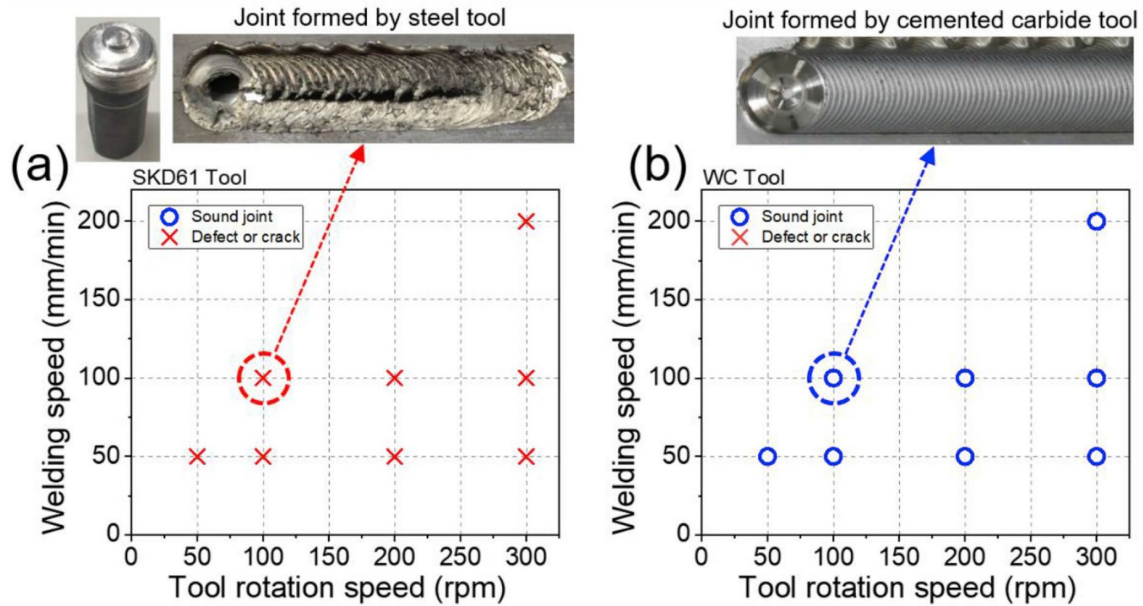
Butt FSW of 3 mm thick LZ91. Process windows using different tool materials: (a) SKD61 tool and (b) WC tool [28].
